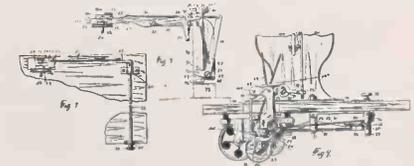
is a perspective view of the complete machine with the case thrown open so as to show the general arrangement of the parts. Fig. 2 is an enlarged front elevation of the upper portion of the machine showing especially the arrangement
